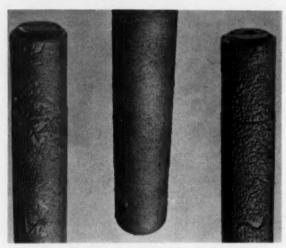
Comparison of surface of spindle end of casting poured in zircon sand, silica sand facing with iron grit back up and silica sand shell molds (left to right). The orange peel defect on the casting on the left should not be confused with the shell mold defect.
